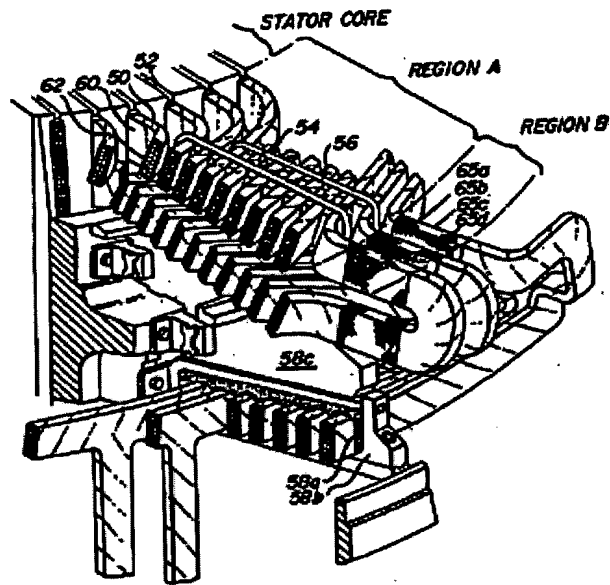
Machine Having Conventional Bar-Type Machine Windings
